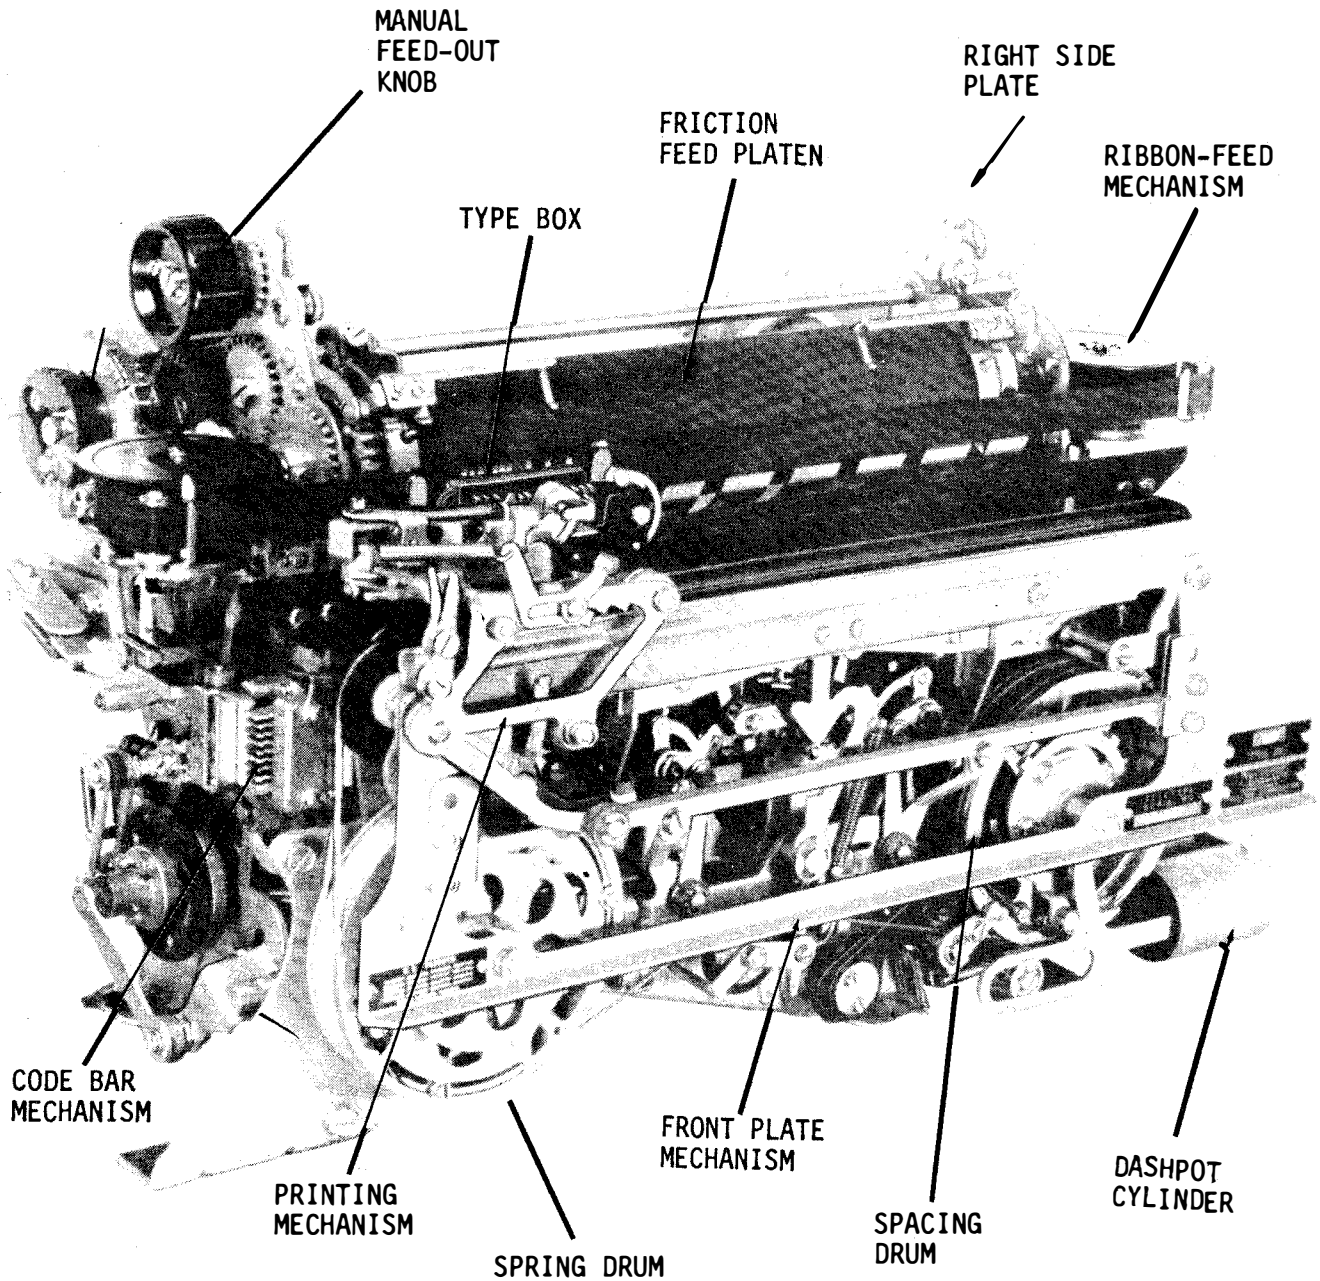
Typing Unit Model 28 (Sprocket Feed), Left Front View
